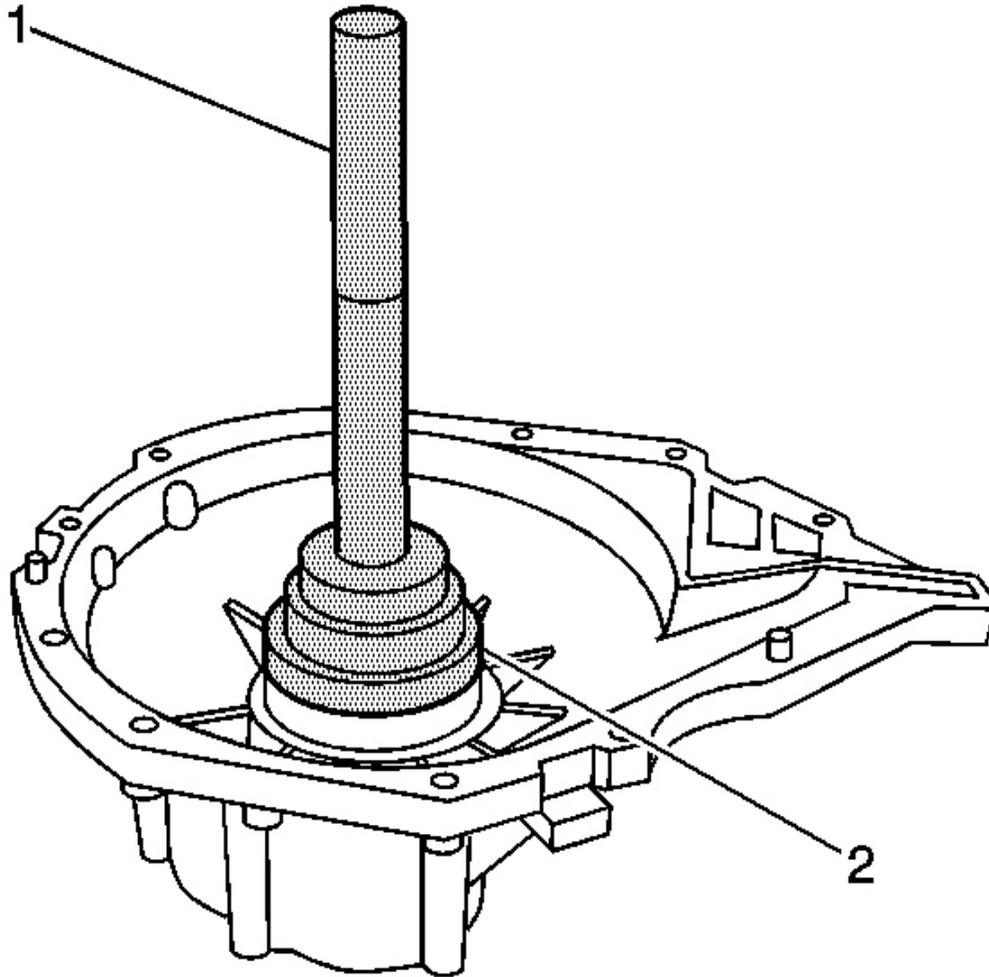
Driving Right Side Differential Adjuster Nut Assembly & New Adjuster Lock Nut Tab Into Differential Carrier Case Half Using J 36609 & J8092
